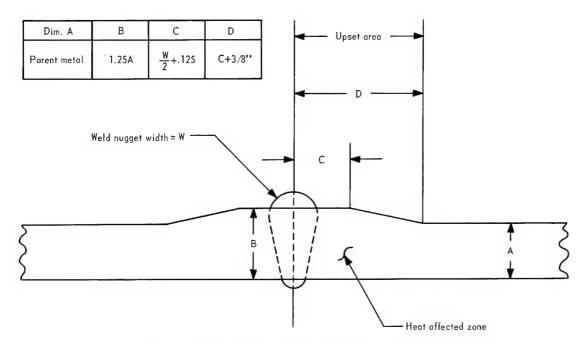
Typical upset weld joint in aluminum alloy plate stock.
